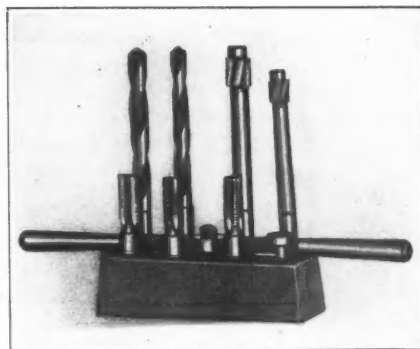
Block containing Set of Tools for Drilling, Counterboring and Tapping
